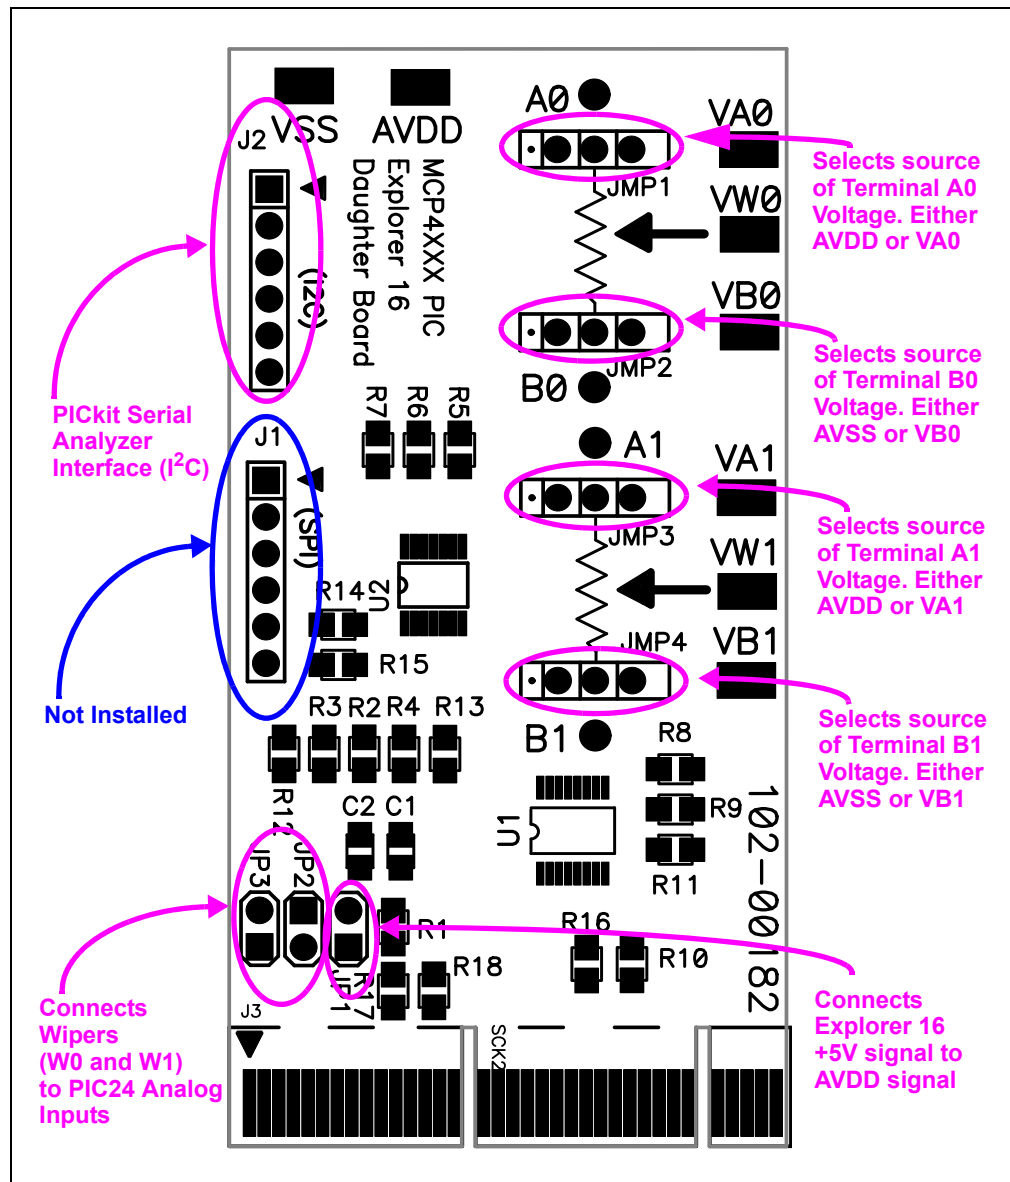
MCP46XX Explorer 16 Daughter Board Demo Board Connectors.
